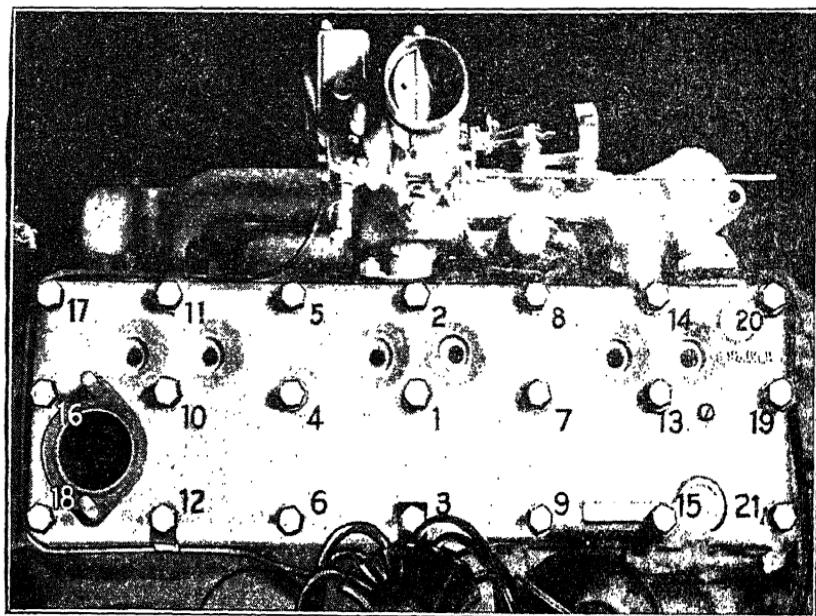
Chrysler Cylinder Showing Order in which Cylinder Head Bolts or Stud Nuts Should Be Tightened
